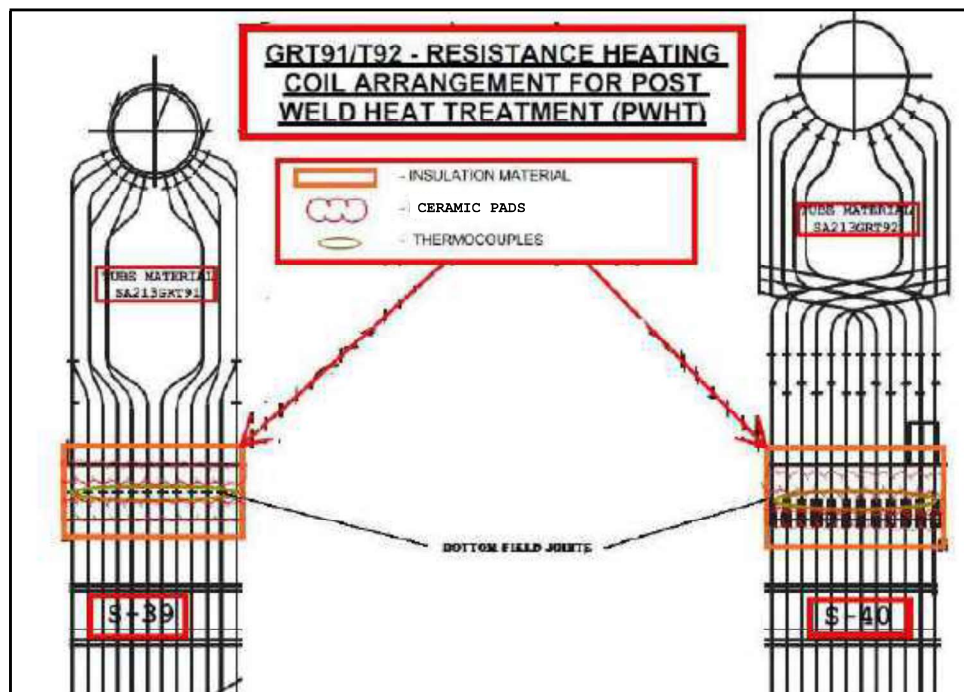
Resistance heating Coil arrangement for PWHT of T91/T92 tube assembly
